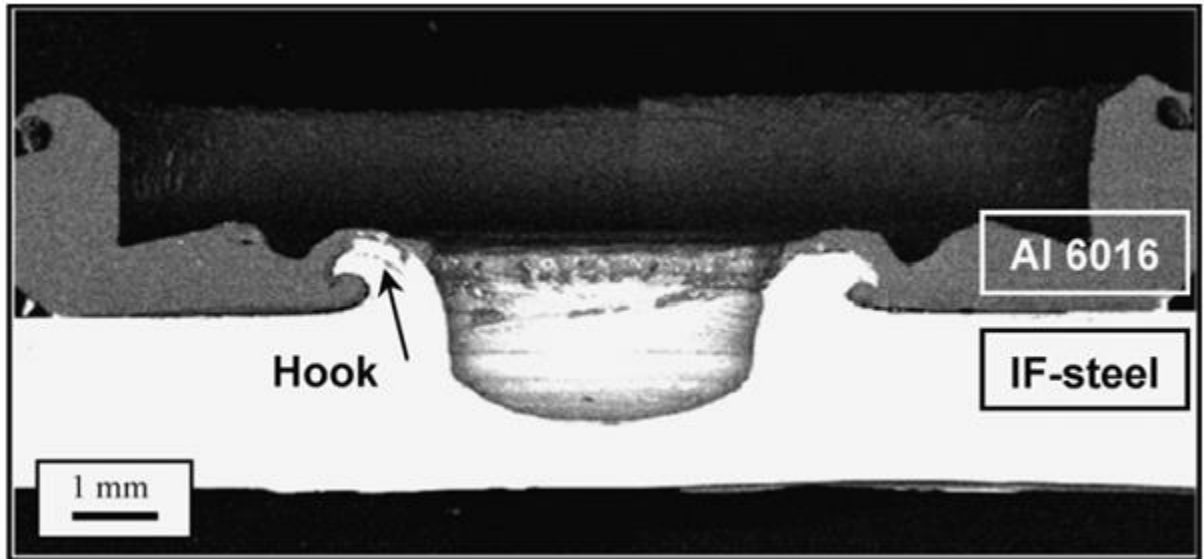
Cross section of an aluminum to steel FSSW spot weld using a tool that penetrates into the steel sheet [Bozzi]
